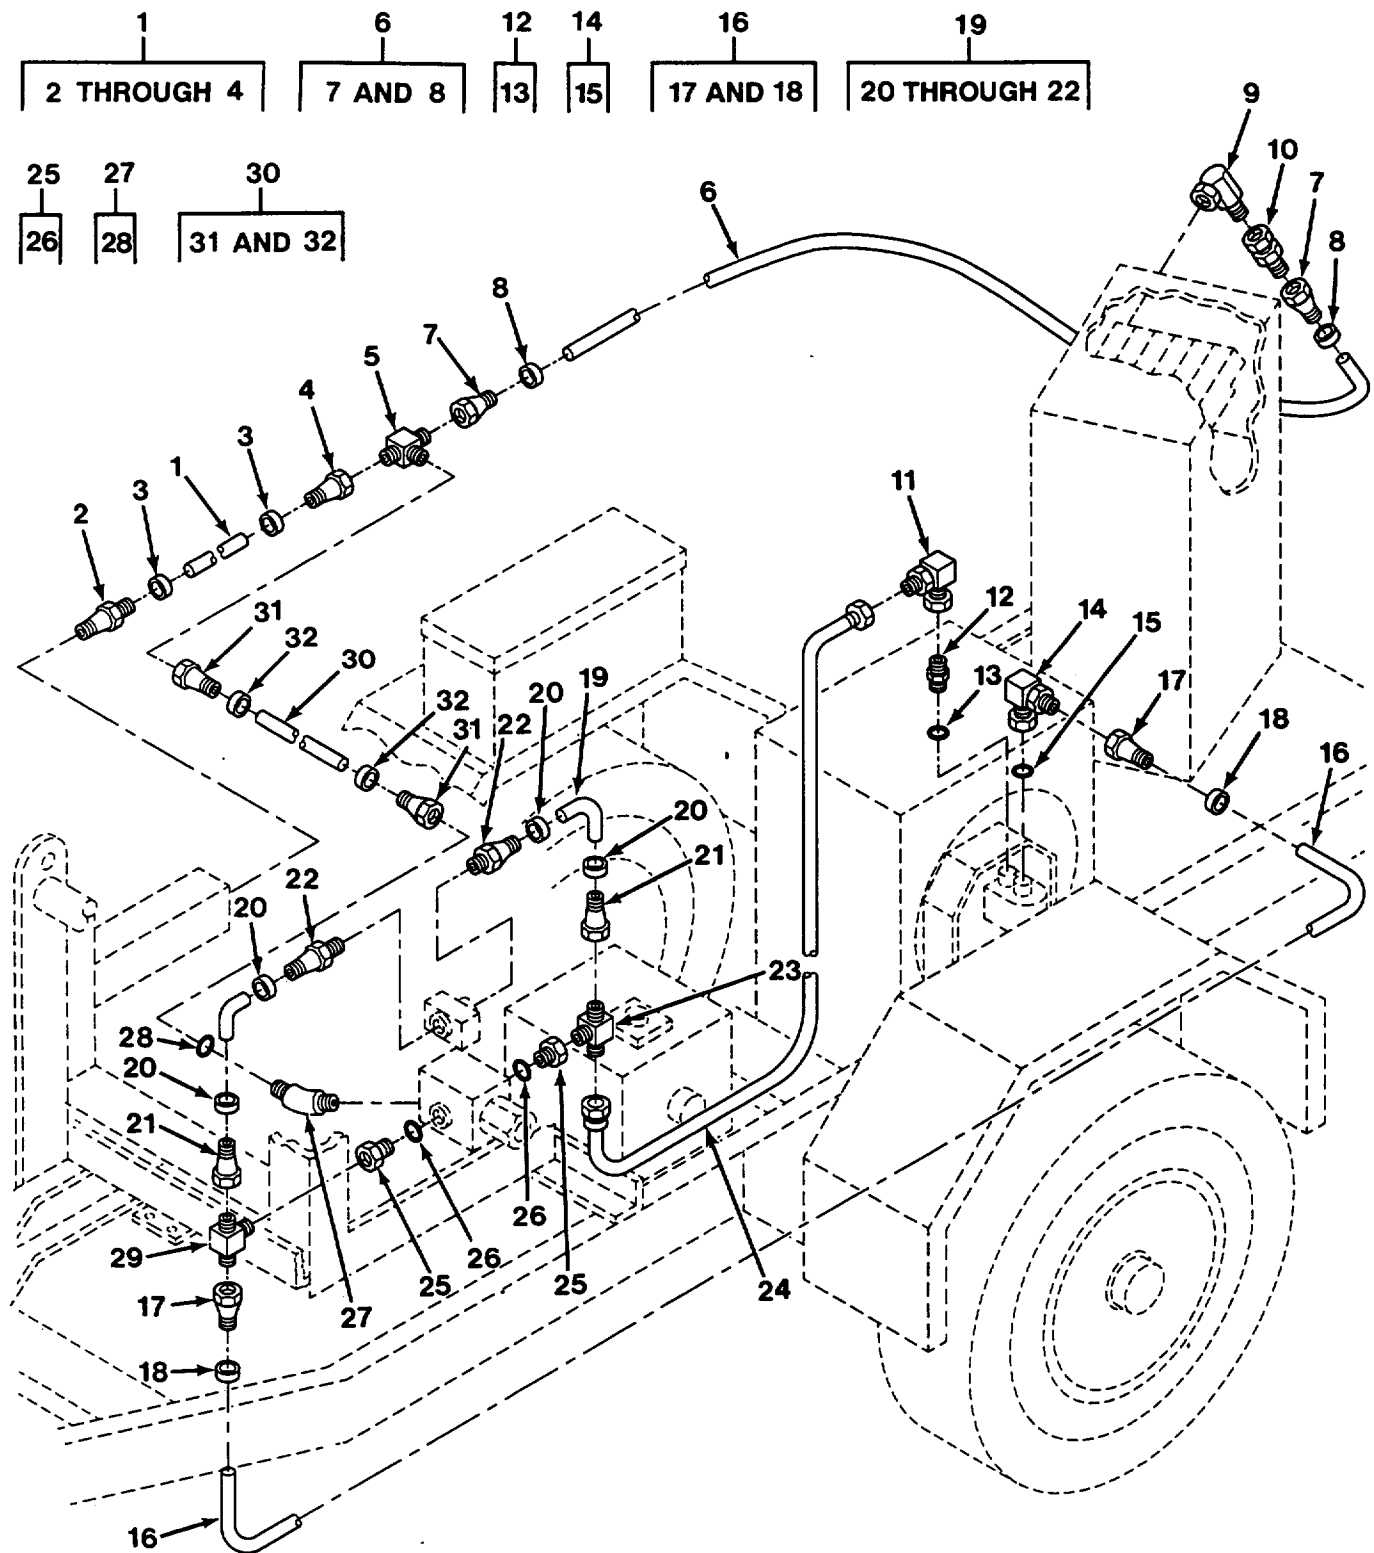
PUMP AND MOTOR HYDRAULIC LINES AND FITTINGS
